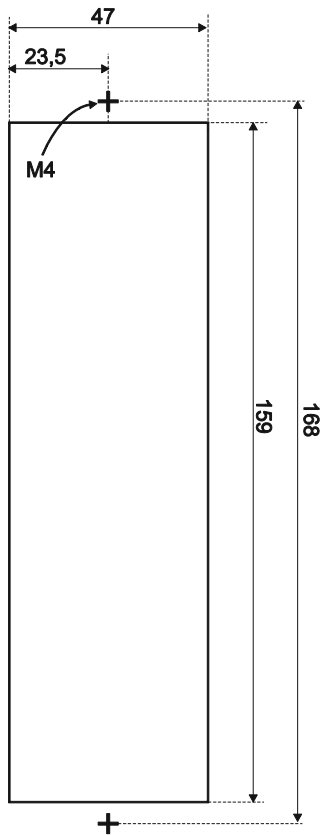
AQ101 cut out for panel mounting, scaling in millimeter.
